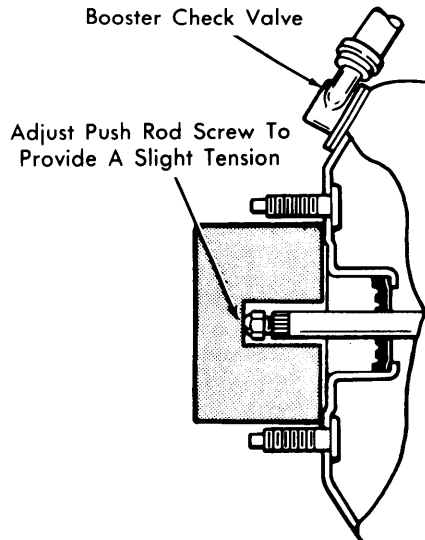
Using Gauge to Measure Push Rod Protrusion
